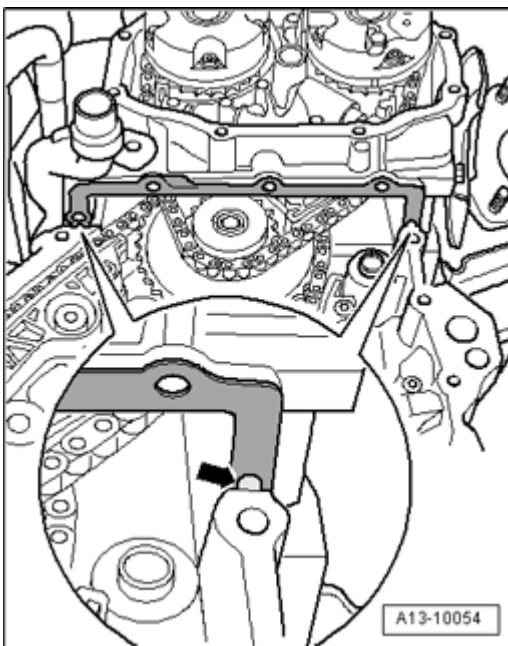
Cleaning Old Sealant From Holes In Cylinder Head Gaskets
